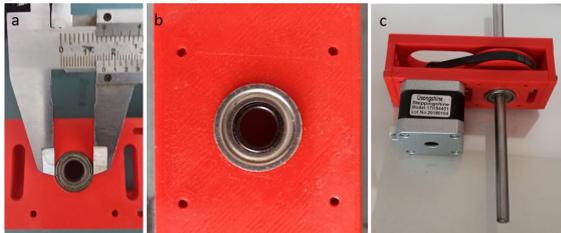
Sample application manufacturing a) rolling bearing on the successfully machined workpiece b) bearing sample view c.) manufacturing completed model.
